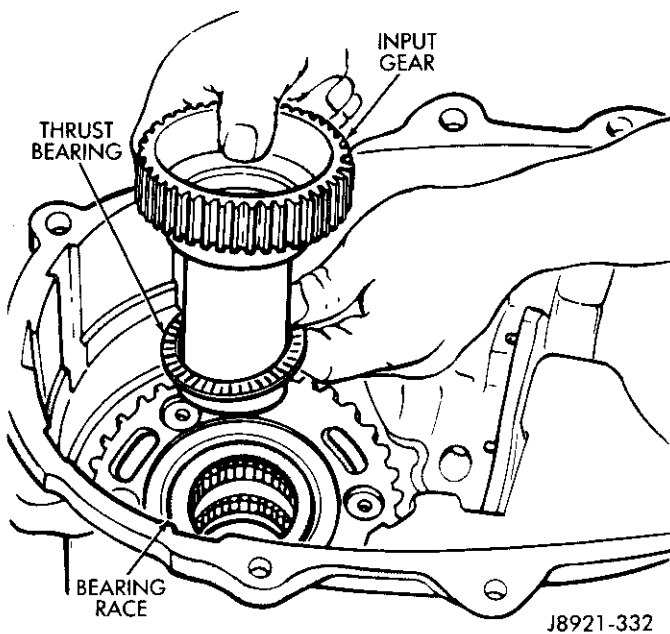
Installing Input Gear, Thrust Bearing And Race
